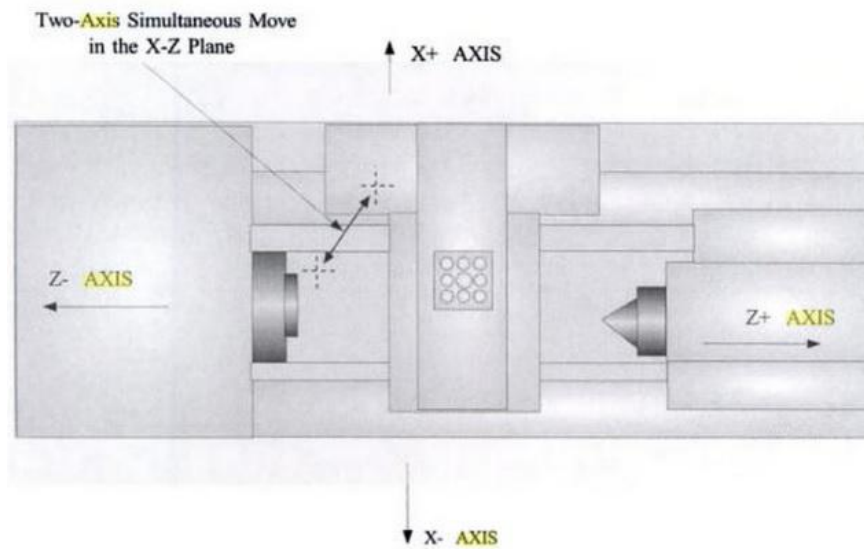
Two axis simultaneous machining (Lathe machine), [16]
